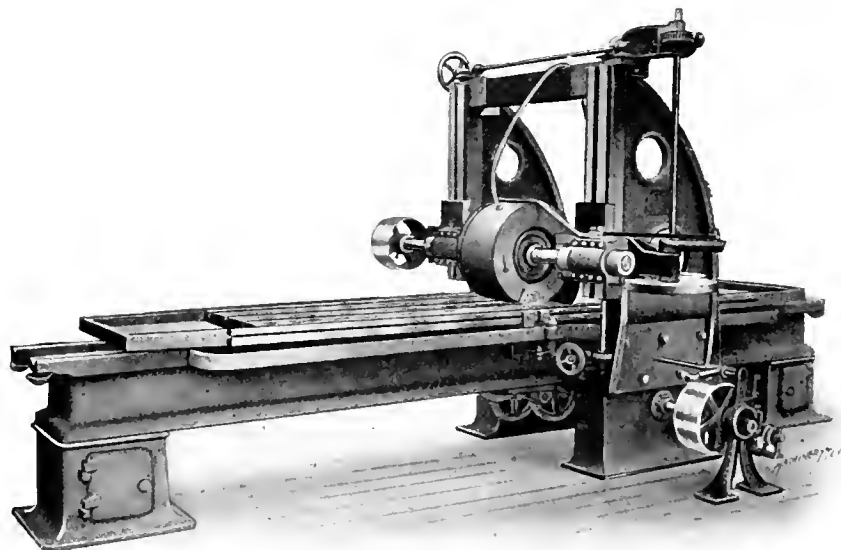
Oscillating Surface Grinder for Rapid Reduction
